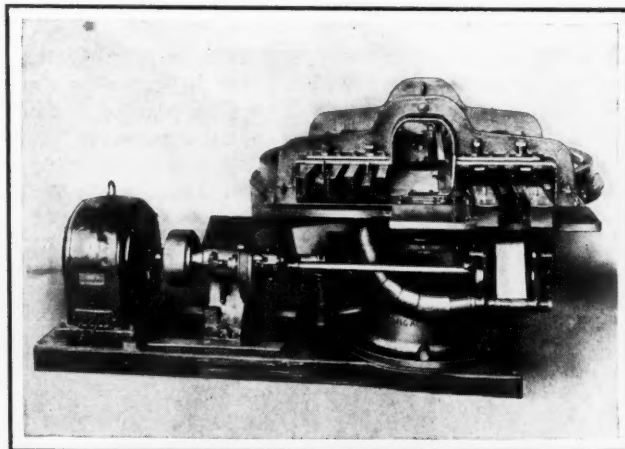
Arrangement of the Special Feeding Fixture and Motor Drive
